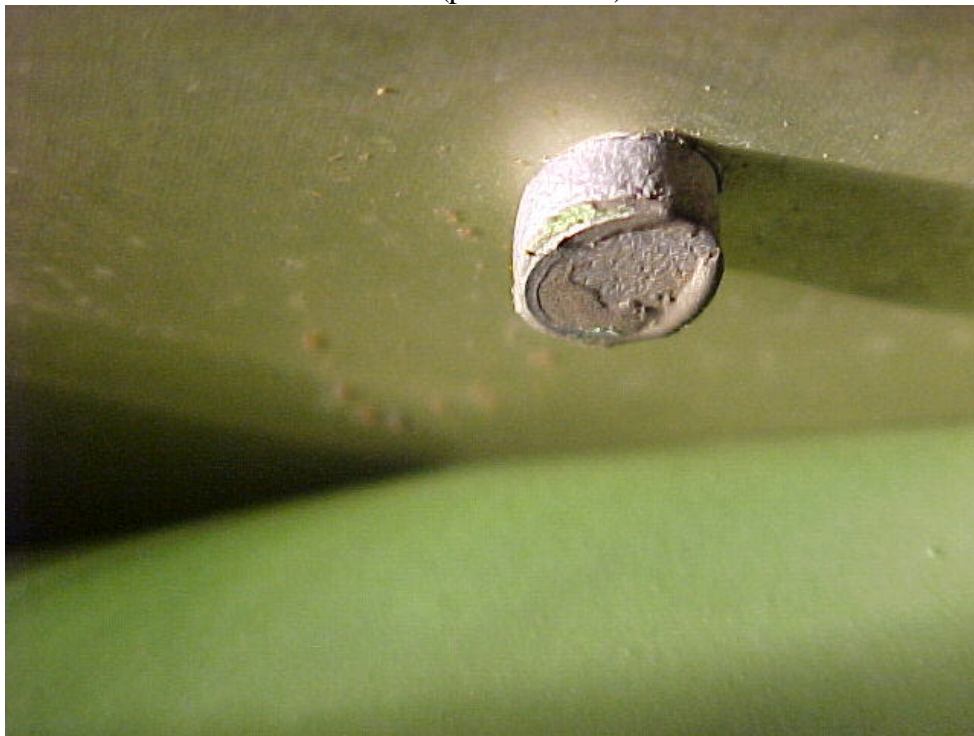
Photograph showing internal detailed visual inspection indication at BS 720, stringer 4R, rivet 11 (panel FT2/F4).
